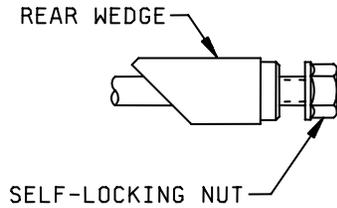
Screw retaining self-locking nut (corrosion resistant) details.
